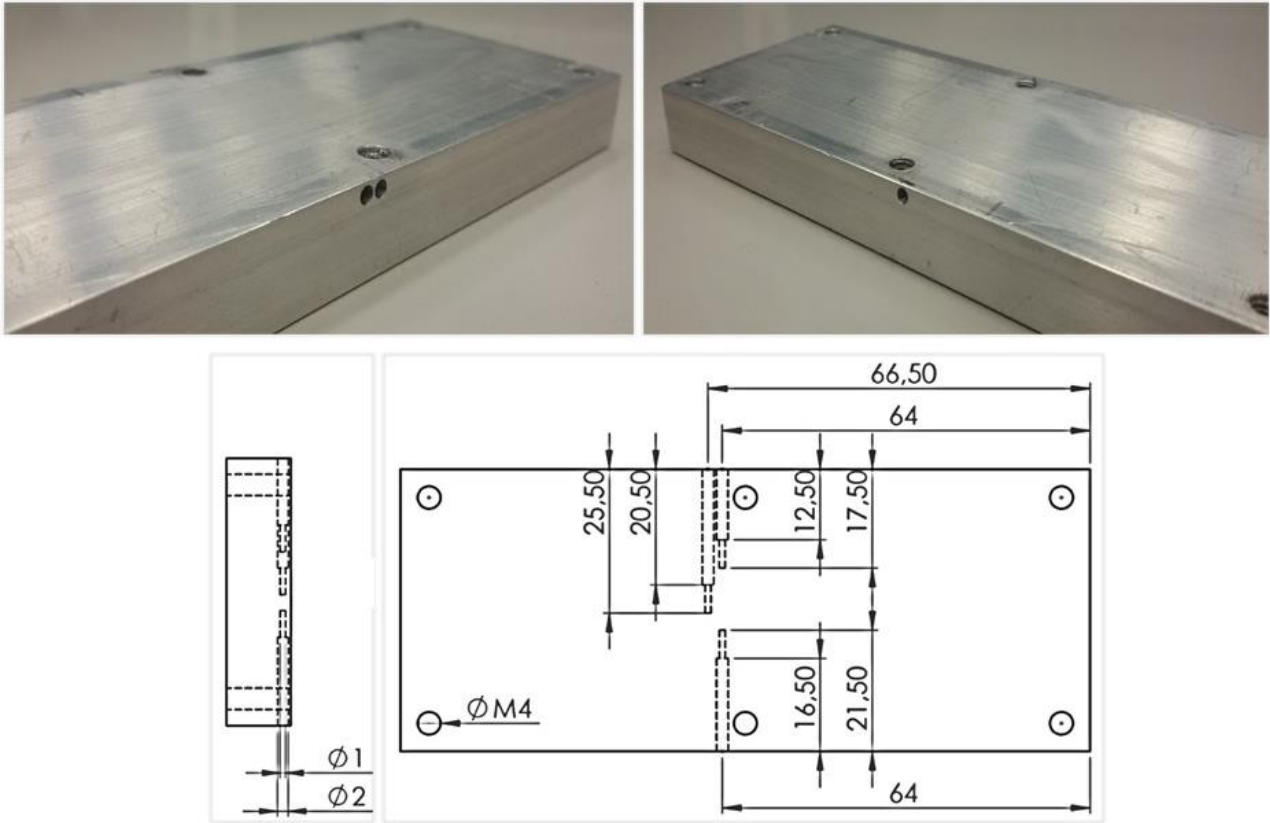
View of the aluminum bottom side and CAD drawing of the thermocouples venues.
